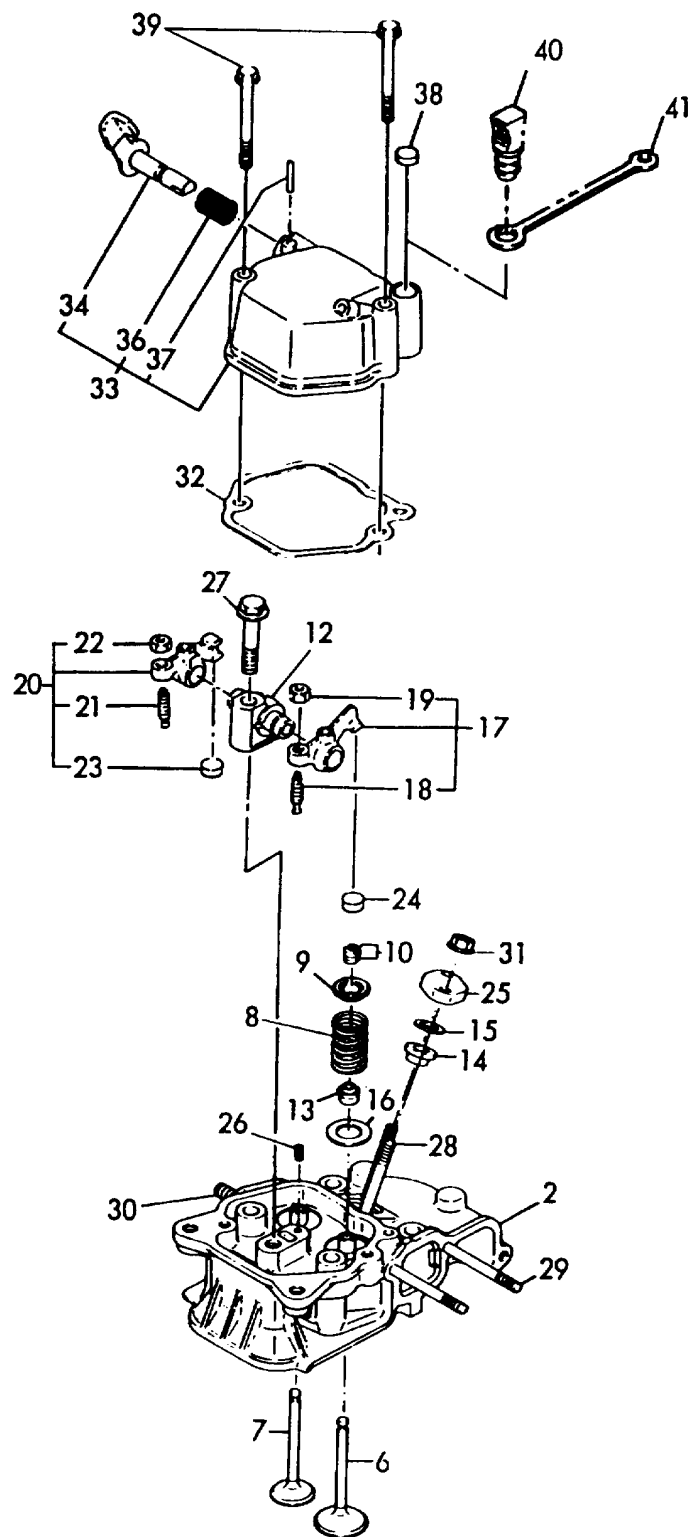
CYLINDER HEAD AND BONNET ASSEMBLY
